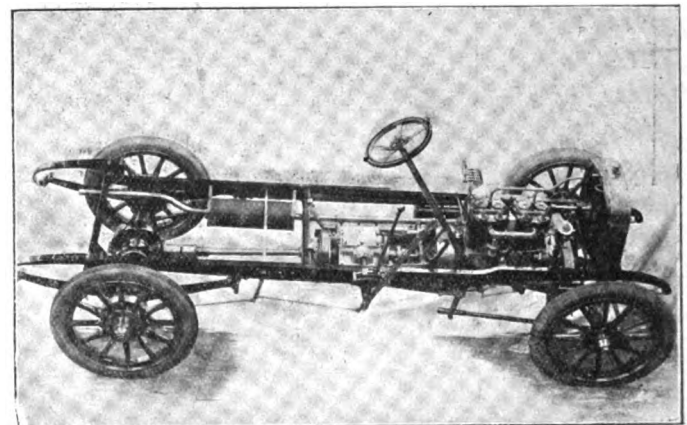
Chassis of Vulcan 16-h.p. Four-Cylinder Car.
